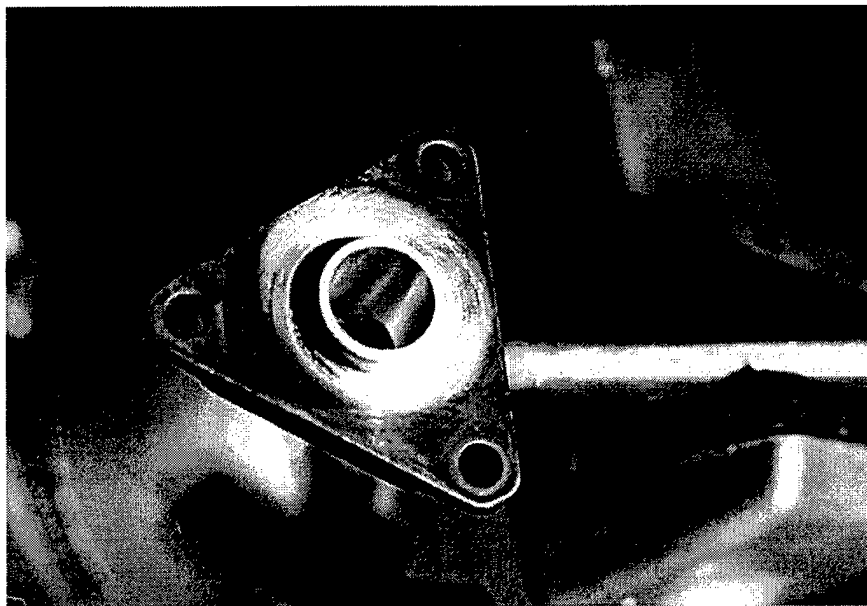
Actual Jet Engine Tube End After Cleaning with Waterjet
